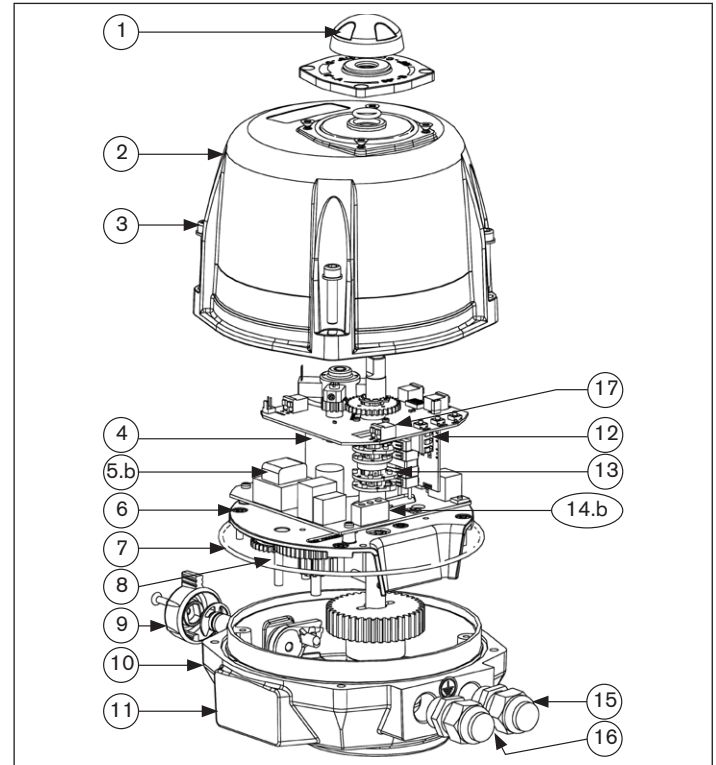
Exploded views Motor 25 - 75 Nm with control card
